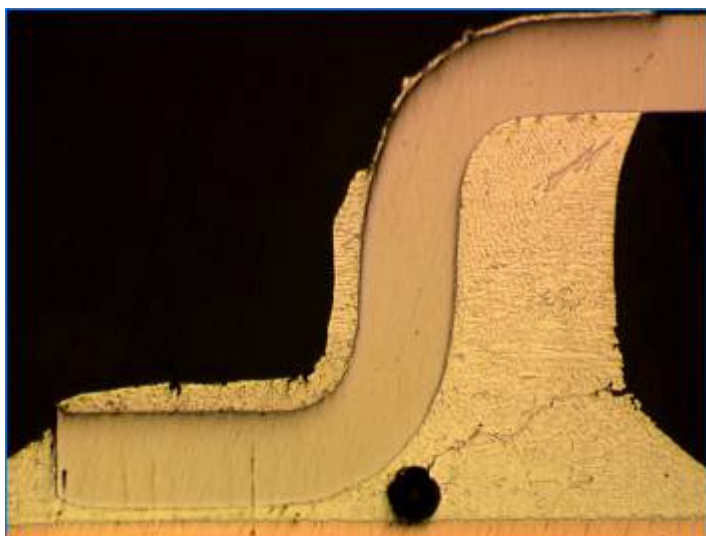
cross section, SN66, U62, left lead solder crack and void, 100x
